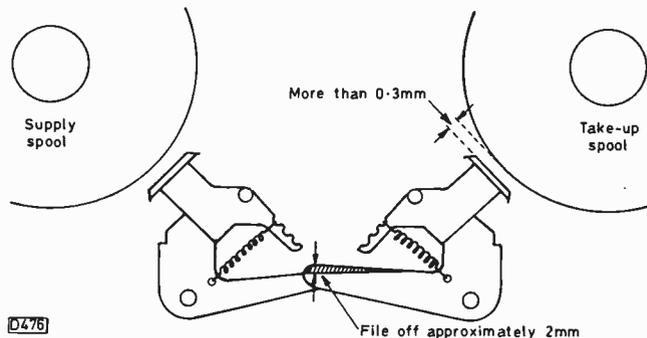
Mechanical modification to cure tape damage due to looping when the machine stops after rewind.
